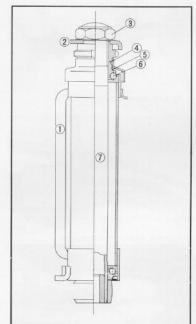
A Steering stem section diagram (S 90, CL 90, CL 90L)
